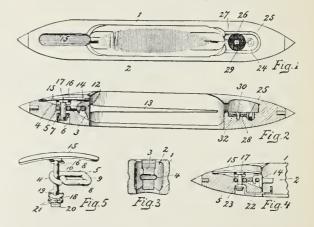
Fig. I is a plan view of this shuttle showing a full cop on its spindle. Fig. 2 is a central longitudinal sectional view of the shuttle, having the cop removed. Fig. 3 is a transverse sectional view of the shuttle body, the cop spindle and its supporting devices being removed. Fig. 4 is a longitudinal sectional view of one end of this shuttle constructed for using the filling spun on bobbins. Fig. 5 is a perspective view of the mechanism employed for securing the spindle in position within the shuttle body.
